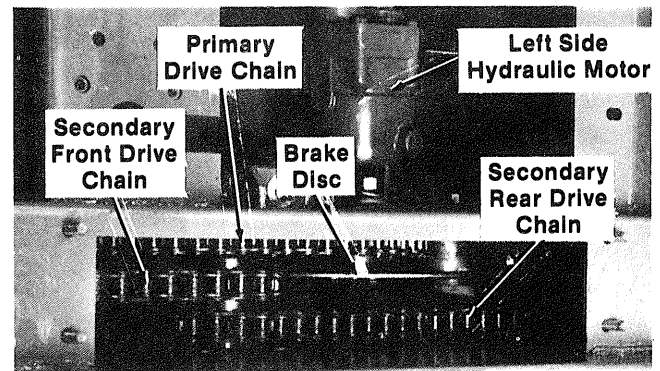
Left Side Drive Motor & Chains (with Chaincase Cover Removed & Oil Drained)
